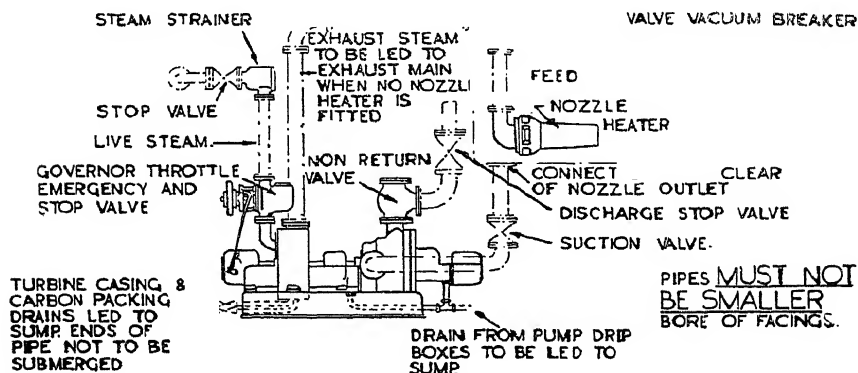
Typical arrangement of turbine-driven feed pump exhausting to nozzle heater in feed tank.
